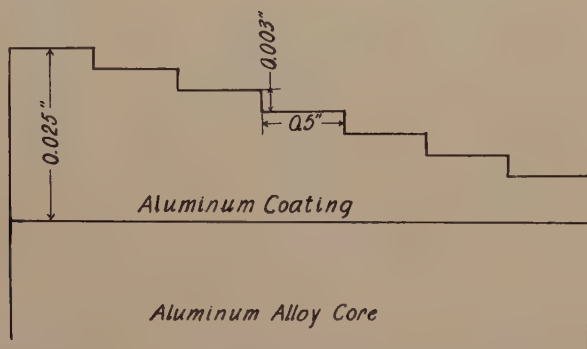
SPECIMEN A8447. DIAGRAMMATIC SKETCH ILLUSTRATING APPEARANCE OF SIDE VIEW OF MACHINED ALCLAD SAMPLE.
